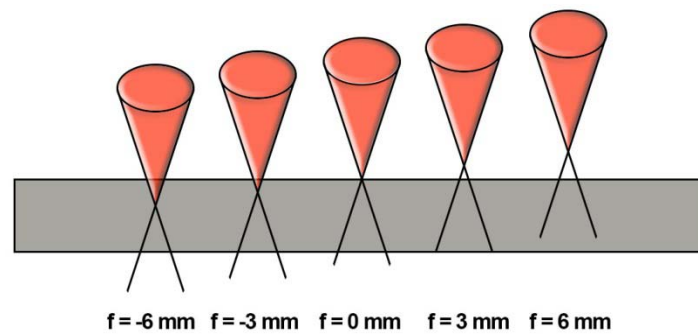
Focus distance set-up for fiber laser welding
